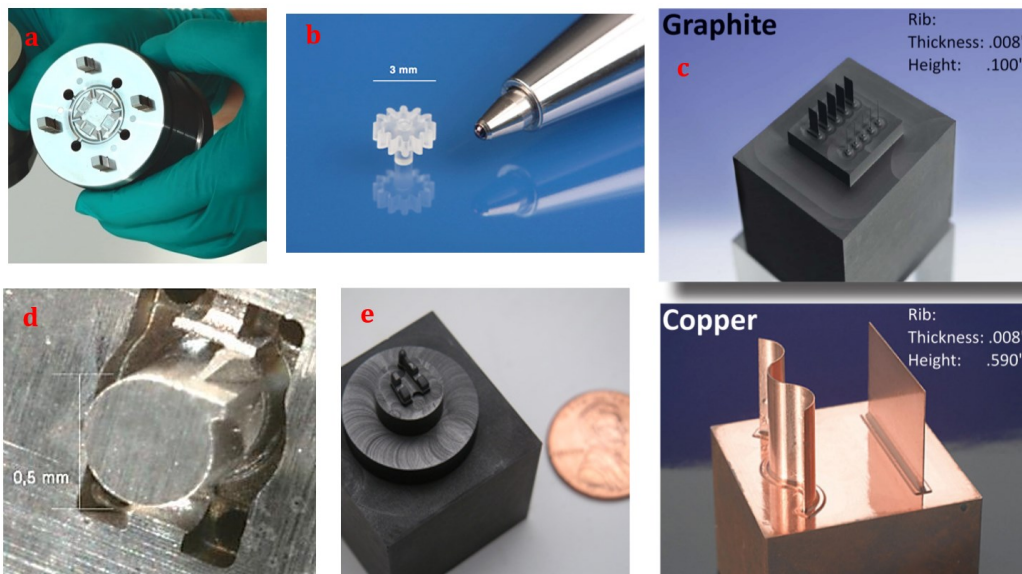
Example of micro-components: mould for injection moulding (a), injection moulded part (b), electrodes for μEDM (c) (e), micro-mould for casting (d).
